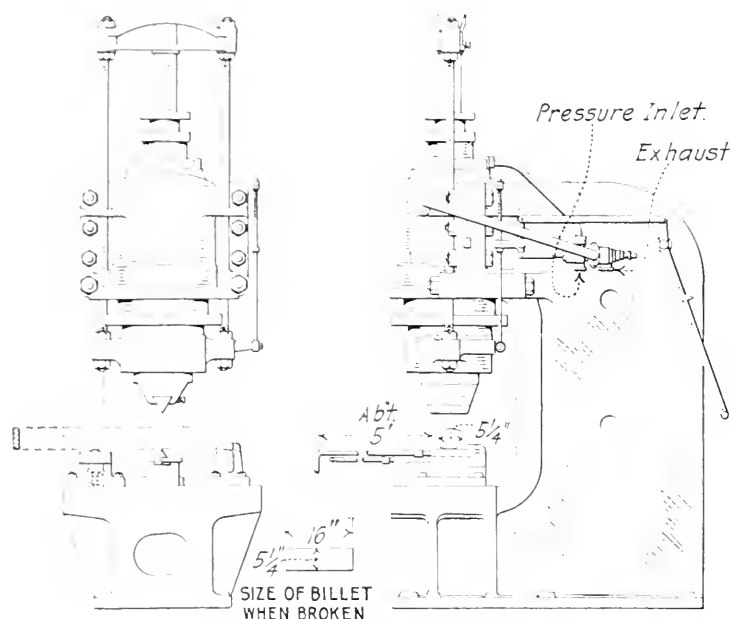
BRITISH 200-TON VERTICAL HYDRAULIC BILLET BREAKER
